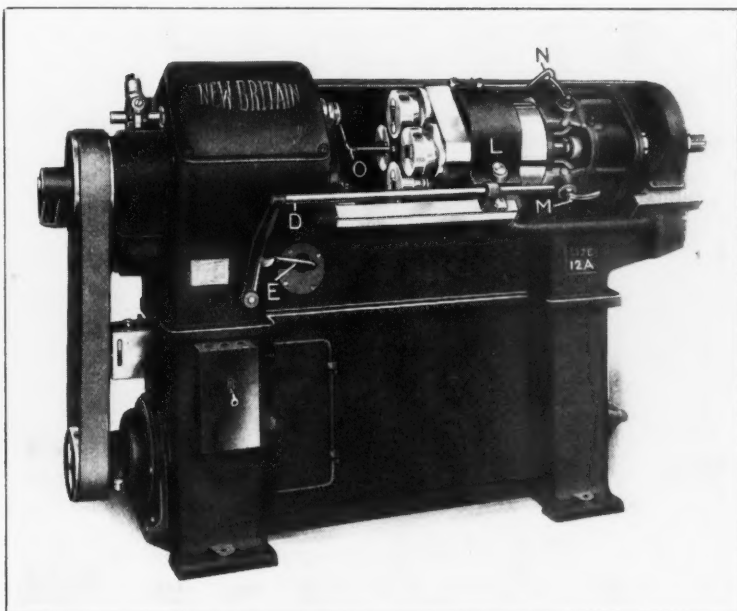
New Britain Chucking Machine of the Tool-rotating Type, equipped with Pneumatically Operated Work-holding Chucks
